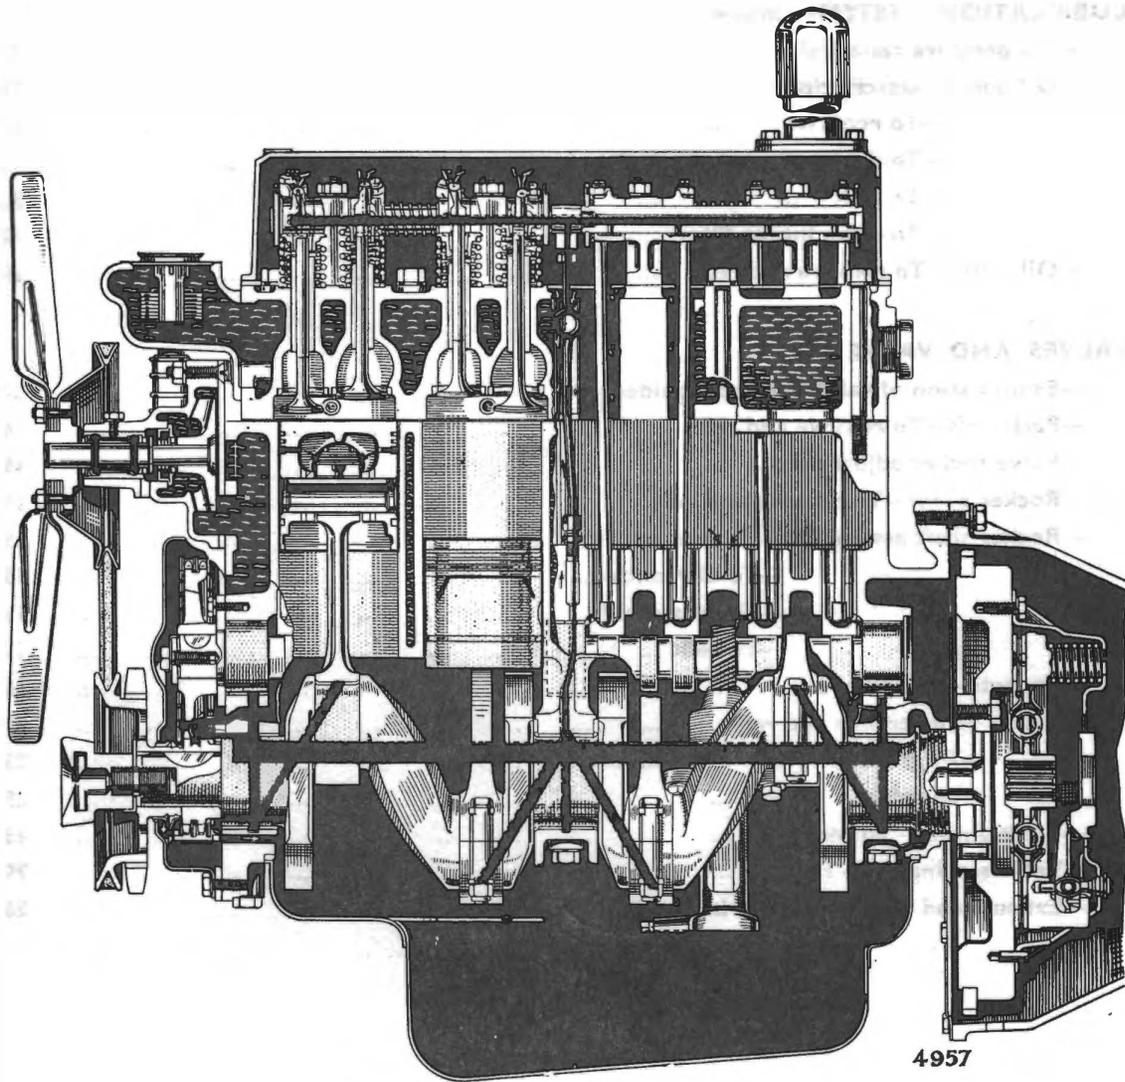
Engine—longitudinal section (1494 c.c. engine shown)
